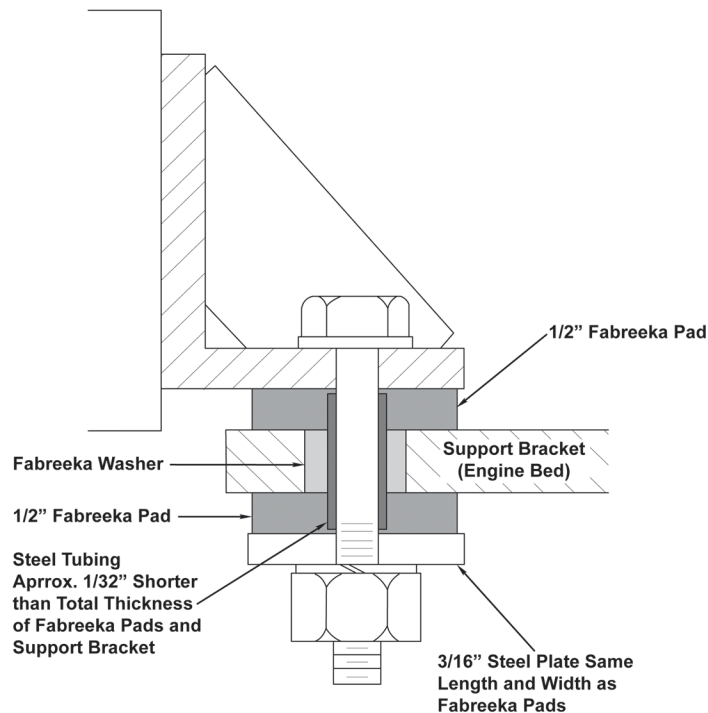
Solid Mounting Using Fabreeka® Type Washers and Pads
